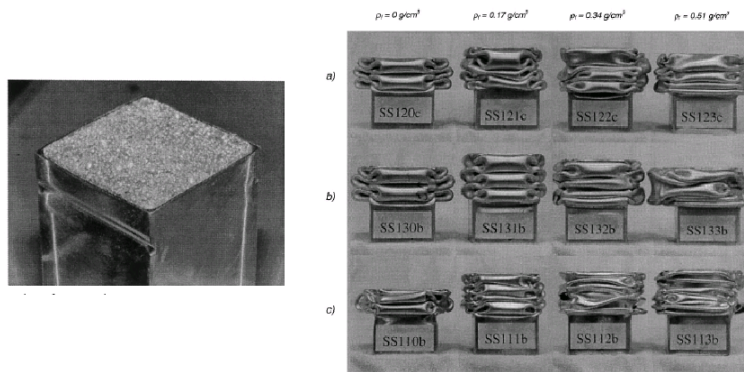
Deformation pattern of sandwich construction under quasi-static loading; (a) shell thickness 1.95 mm; (b) shell thickness 2.45 mm; (c) shell thickness 1.50 mm. (from Hanssen et al. [57]).
